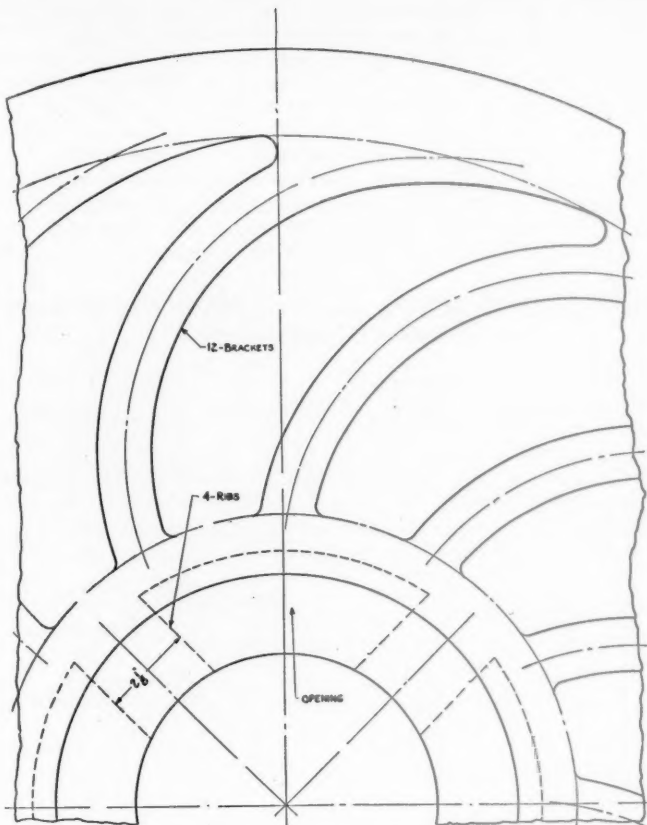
33-In., 750-Lb. Bracket Wheel with Cored Hub for 5½-In. by 10-In. Journal Axles
